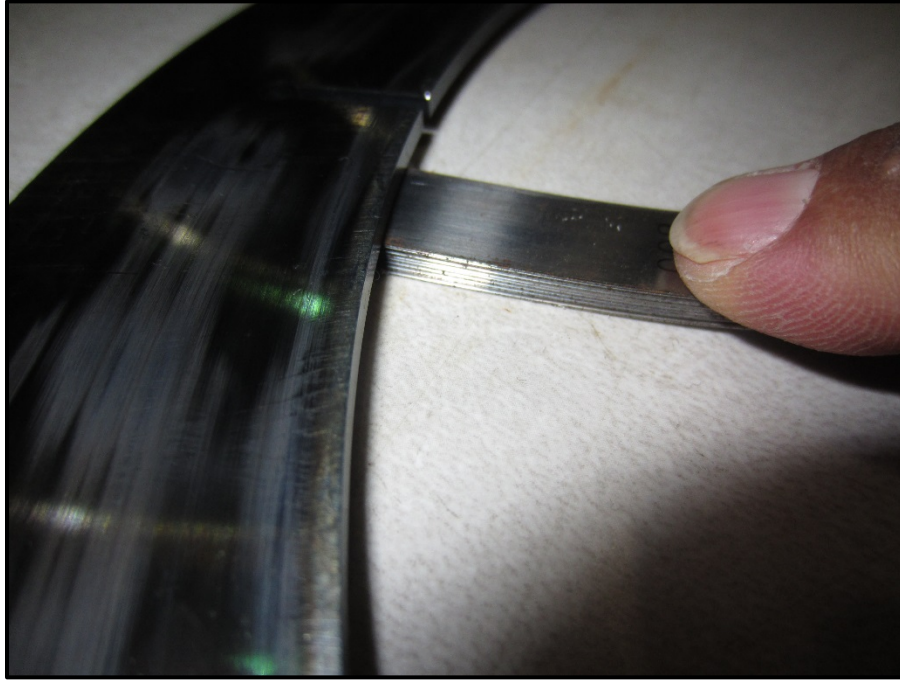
Brake pack steel element coned (deformed) due to heat, top view.
